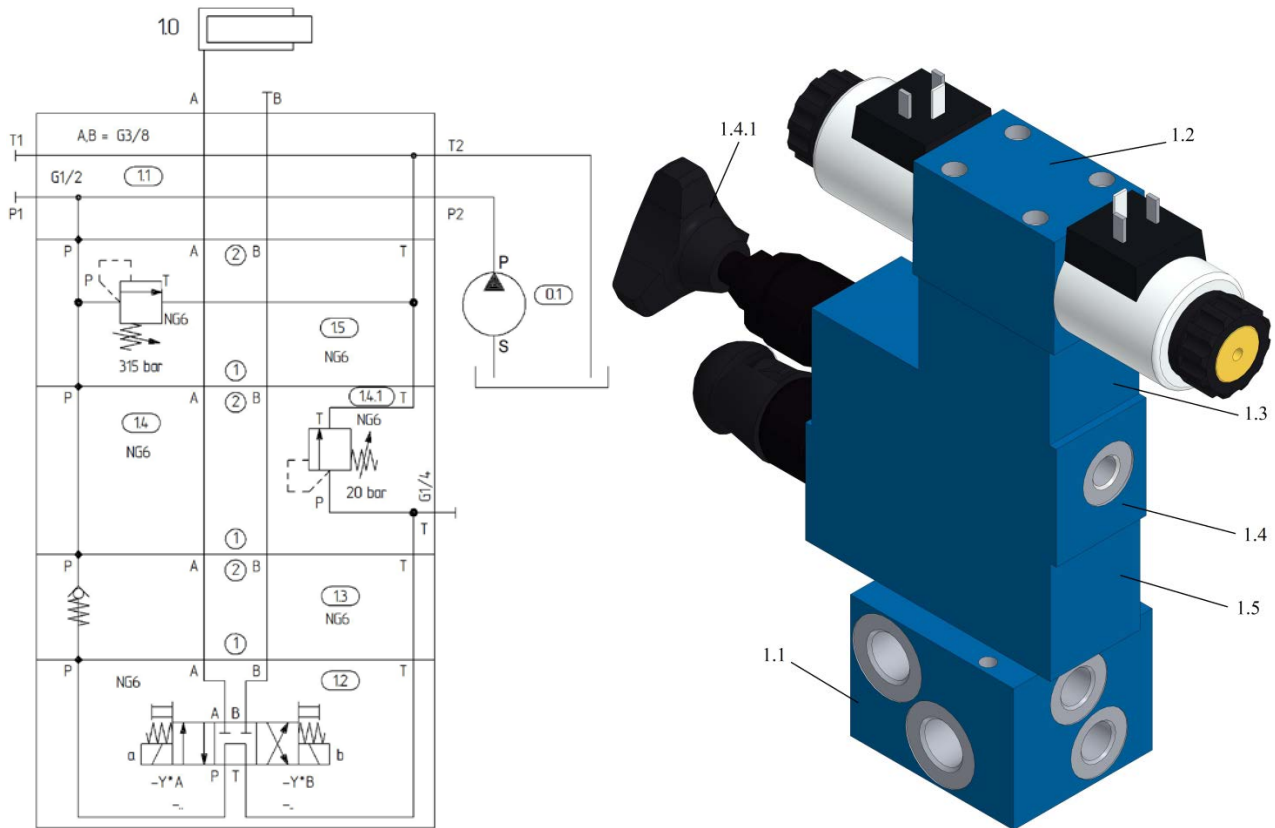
Modular block for control of hydraulic cylinder of loader, elevator and other mechanisms:
